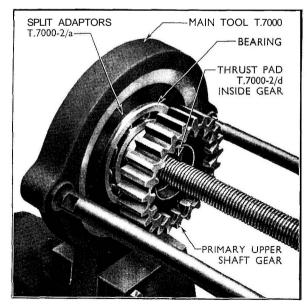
Replacing Bearing on Primary Upper Shaft Gear
